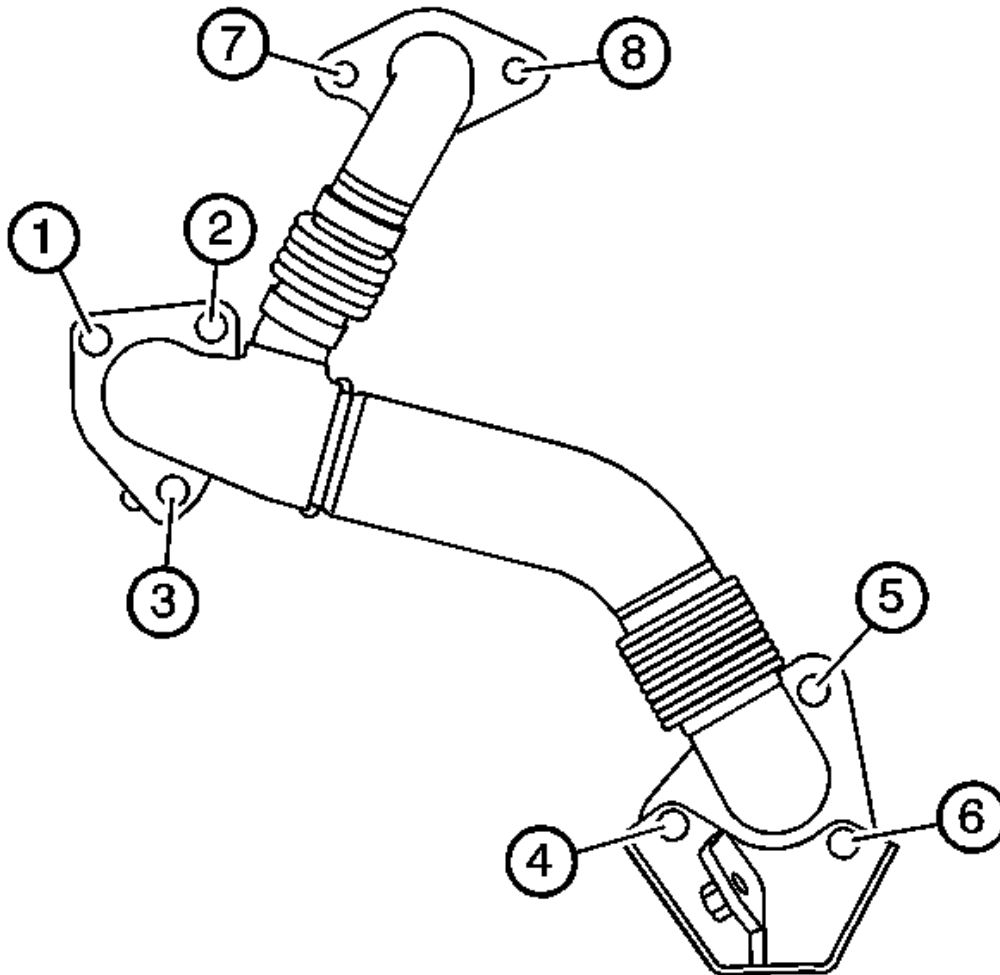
View Of Exhaust Manifold Bolt Tightening Sequence
